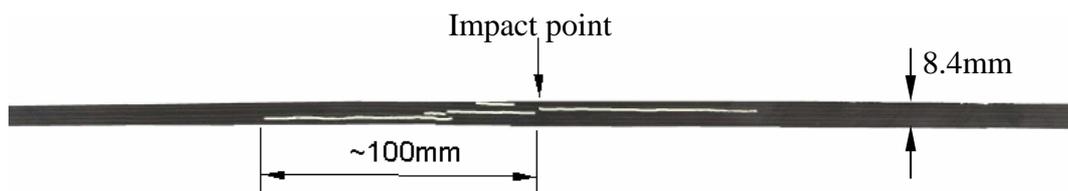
Post impact edge cracking from an edge impacted specimen.
